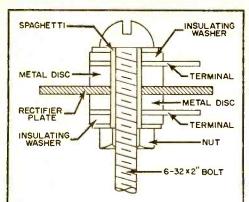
Mechanical assembly of rectifier built around plate taken from burned-out unit. Center bolt should be at least 2" long, and plastic spaghetti is best for insulating plate from bolt. Washers are placed under screw head and nut.
